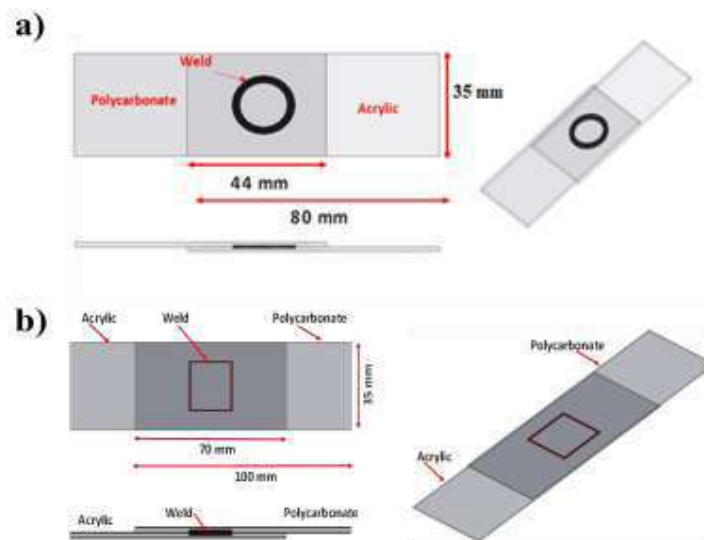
Schematic diagram of (a) circular and (b) square weld geometry used in laser welding
